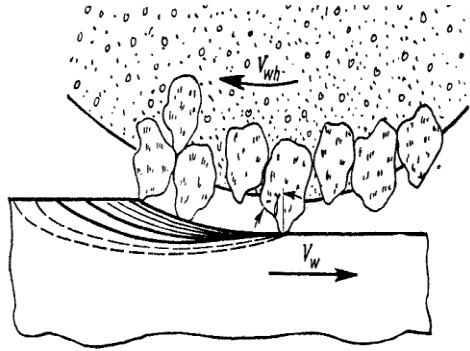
illustrates the cutting action of abrasive grits of disc type grinding wheel similar to cutting action of teeth of the cutter in slab milling. (web resource 1)
